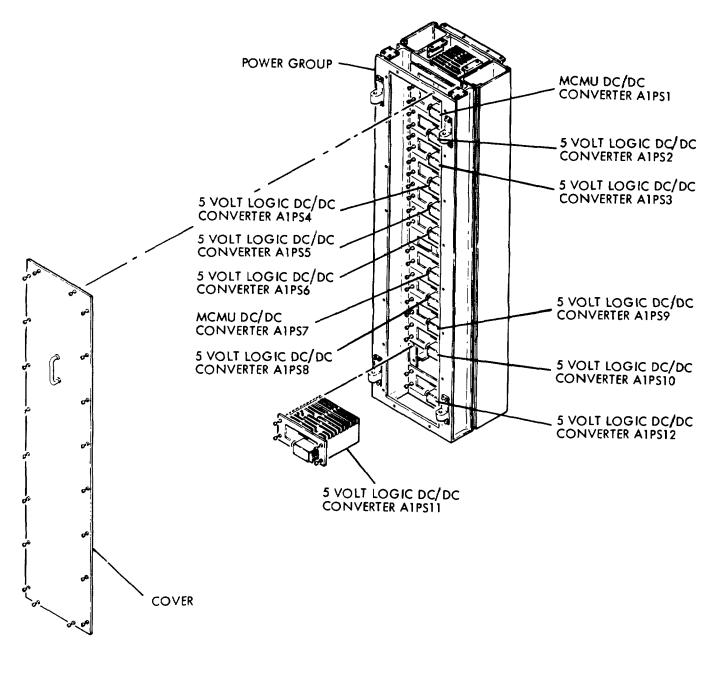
Message Switch ADP Assembly (Sheet 5 of 5).
